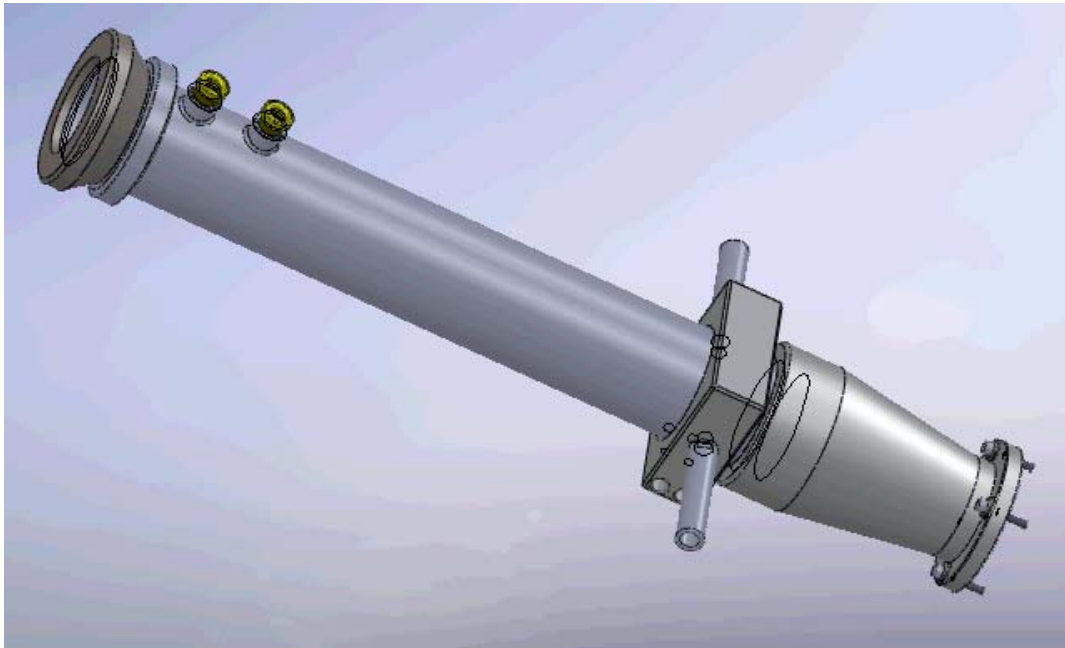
Scheme of the mounted impedance tube showing its different parts.
